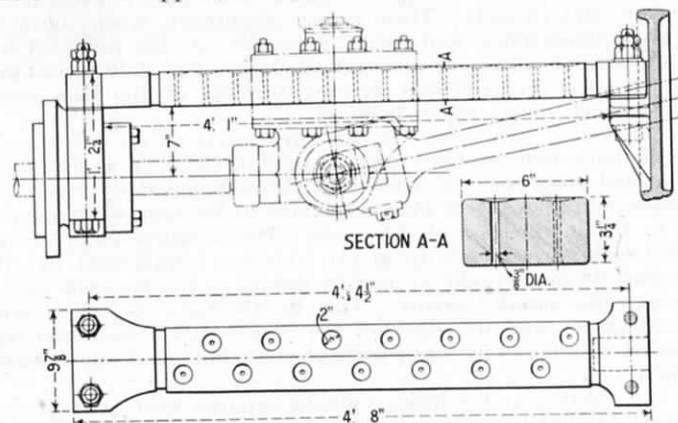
CROSSHEAD FOR SINGLE SLIDE BAR.
